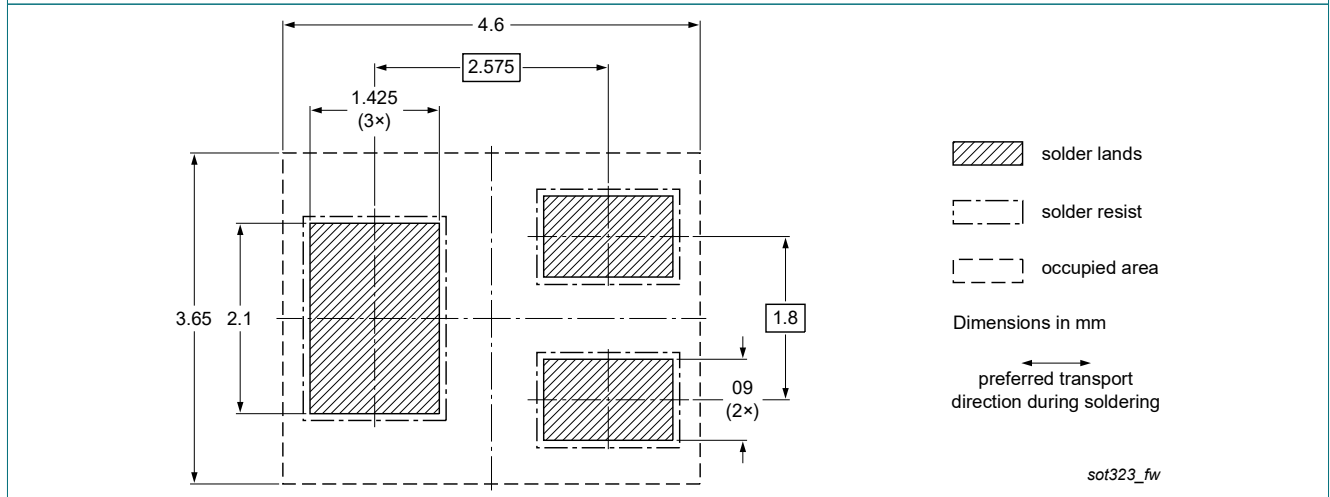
Wave soldering footprint for SC-70 (SOT323)
